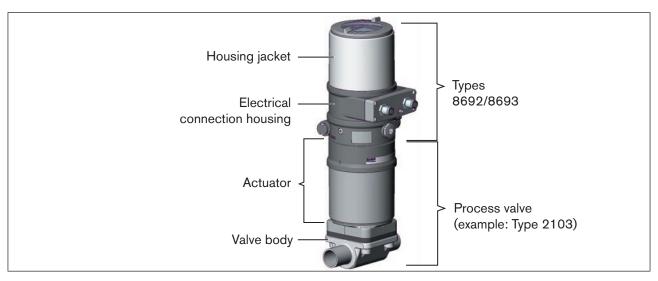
Installation of Type 8692/8693 on process valves, example showing Type 2301
